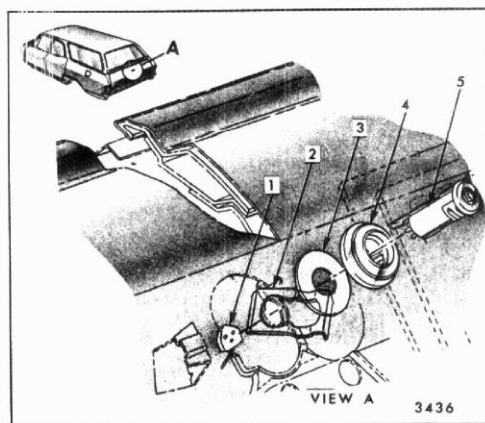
Dual Gate Electric Key Switch and Cylinder Removal - "A" Body
